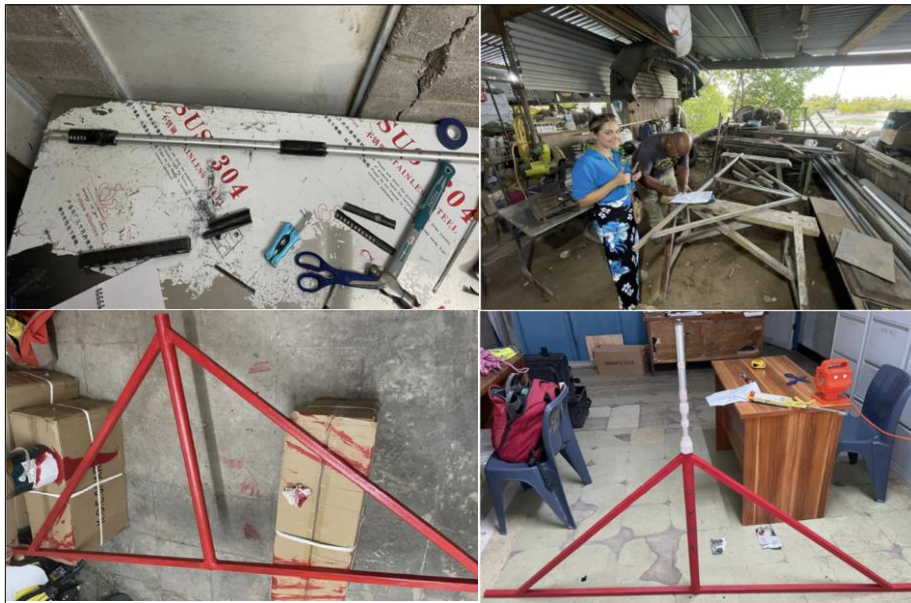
CORS bracket construction process–pole (top left), welded bracket (top right), waterproofed bracket (bottom left), pole attached to bracket (bottom right)
